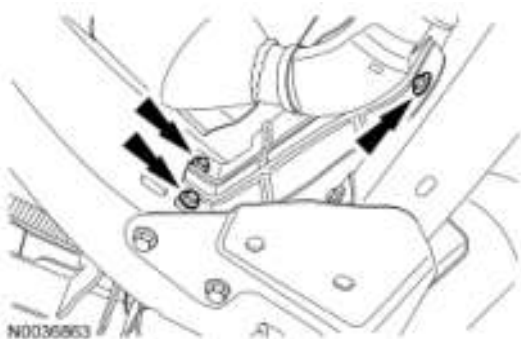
Locating RH Exhaust Heat Shield Bolts
